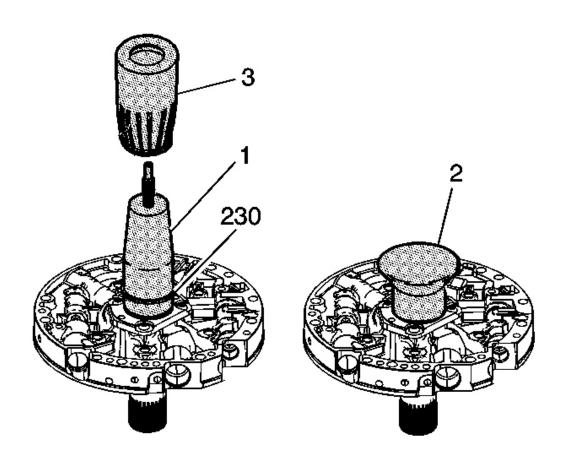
Identifying Special Tools J 39855, J 38735-3 & Stator Shaft Oil Seal Rings Courtesy of GENERAL MOTORS CORP.
